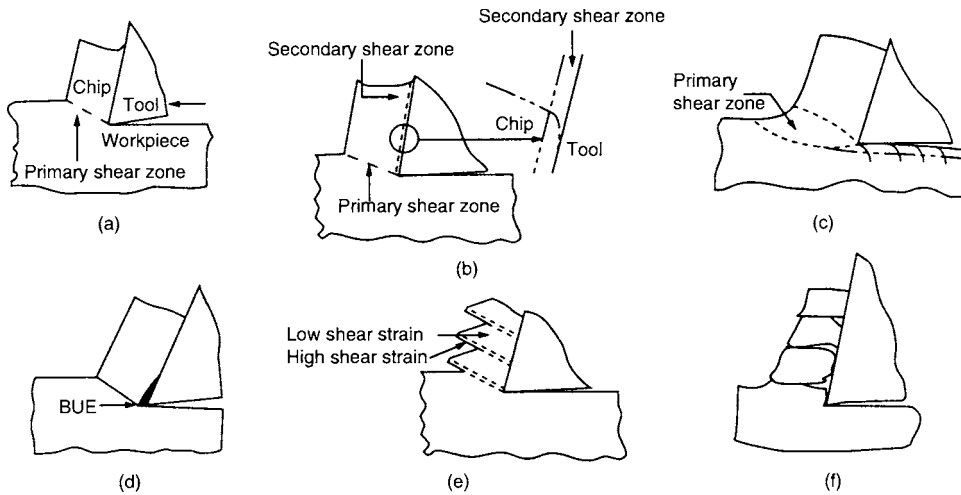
Basic types of chips produced in metal cutting: (a) continuous chip with narrow, straight primary shear zone; (b) secondary shear zone at the tool-chip interface; (c) continuous chip with large primary shear zone; (d) continuous chip with built-up edge; (e) segmented or nonhomogeneous chip, (f) discontinuous chip. (Source: After M. C. Shaw.)
